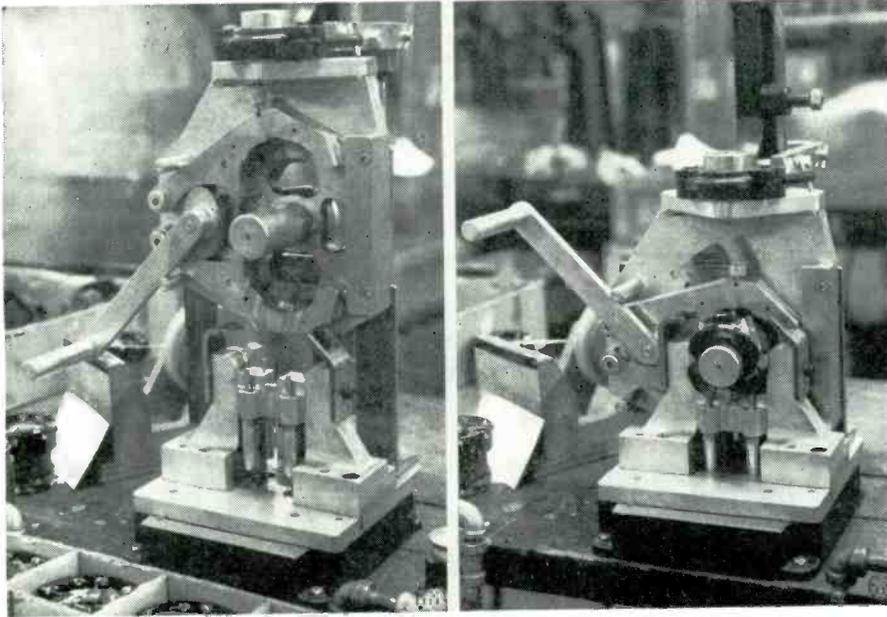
(Left) Coil assembly fixture open and (Right) coil assembly fixture closed
